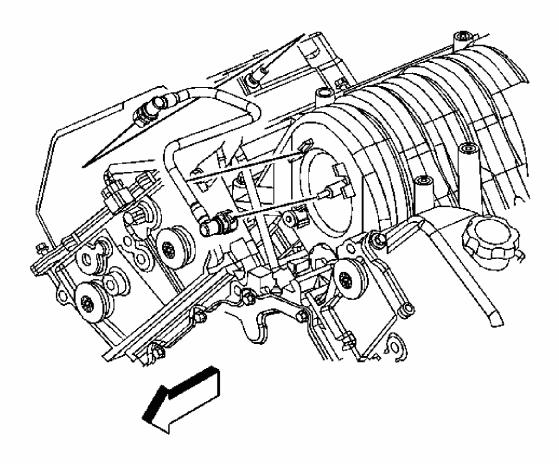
Identifying PCV Foul Air Tube Quick Connect Fitting Courtesy of GENERAL MOTORS CORP.
